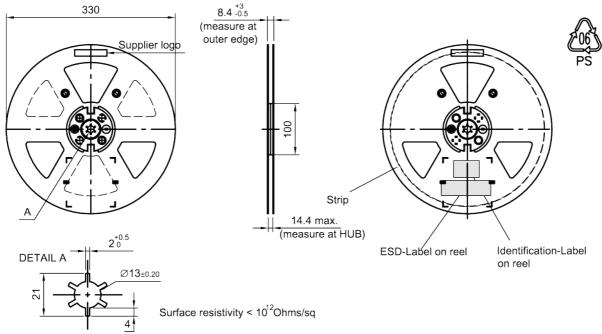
Drawing of reel (first-angle projection) with diameter of 330 mm.
